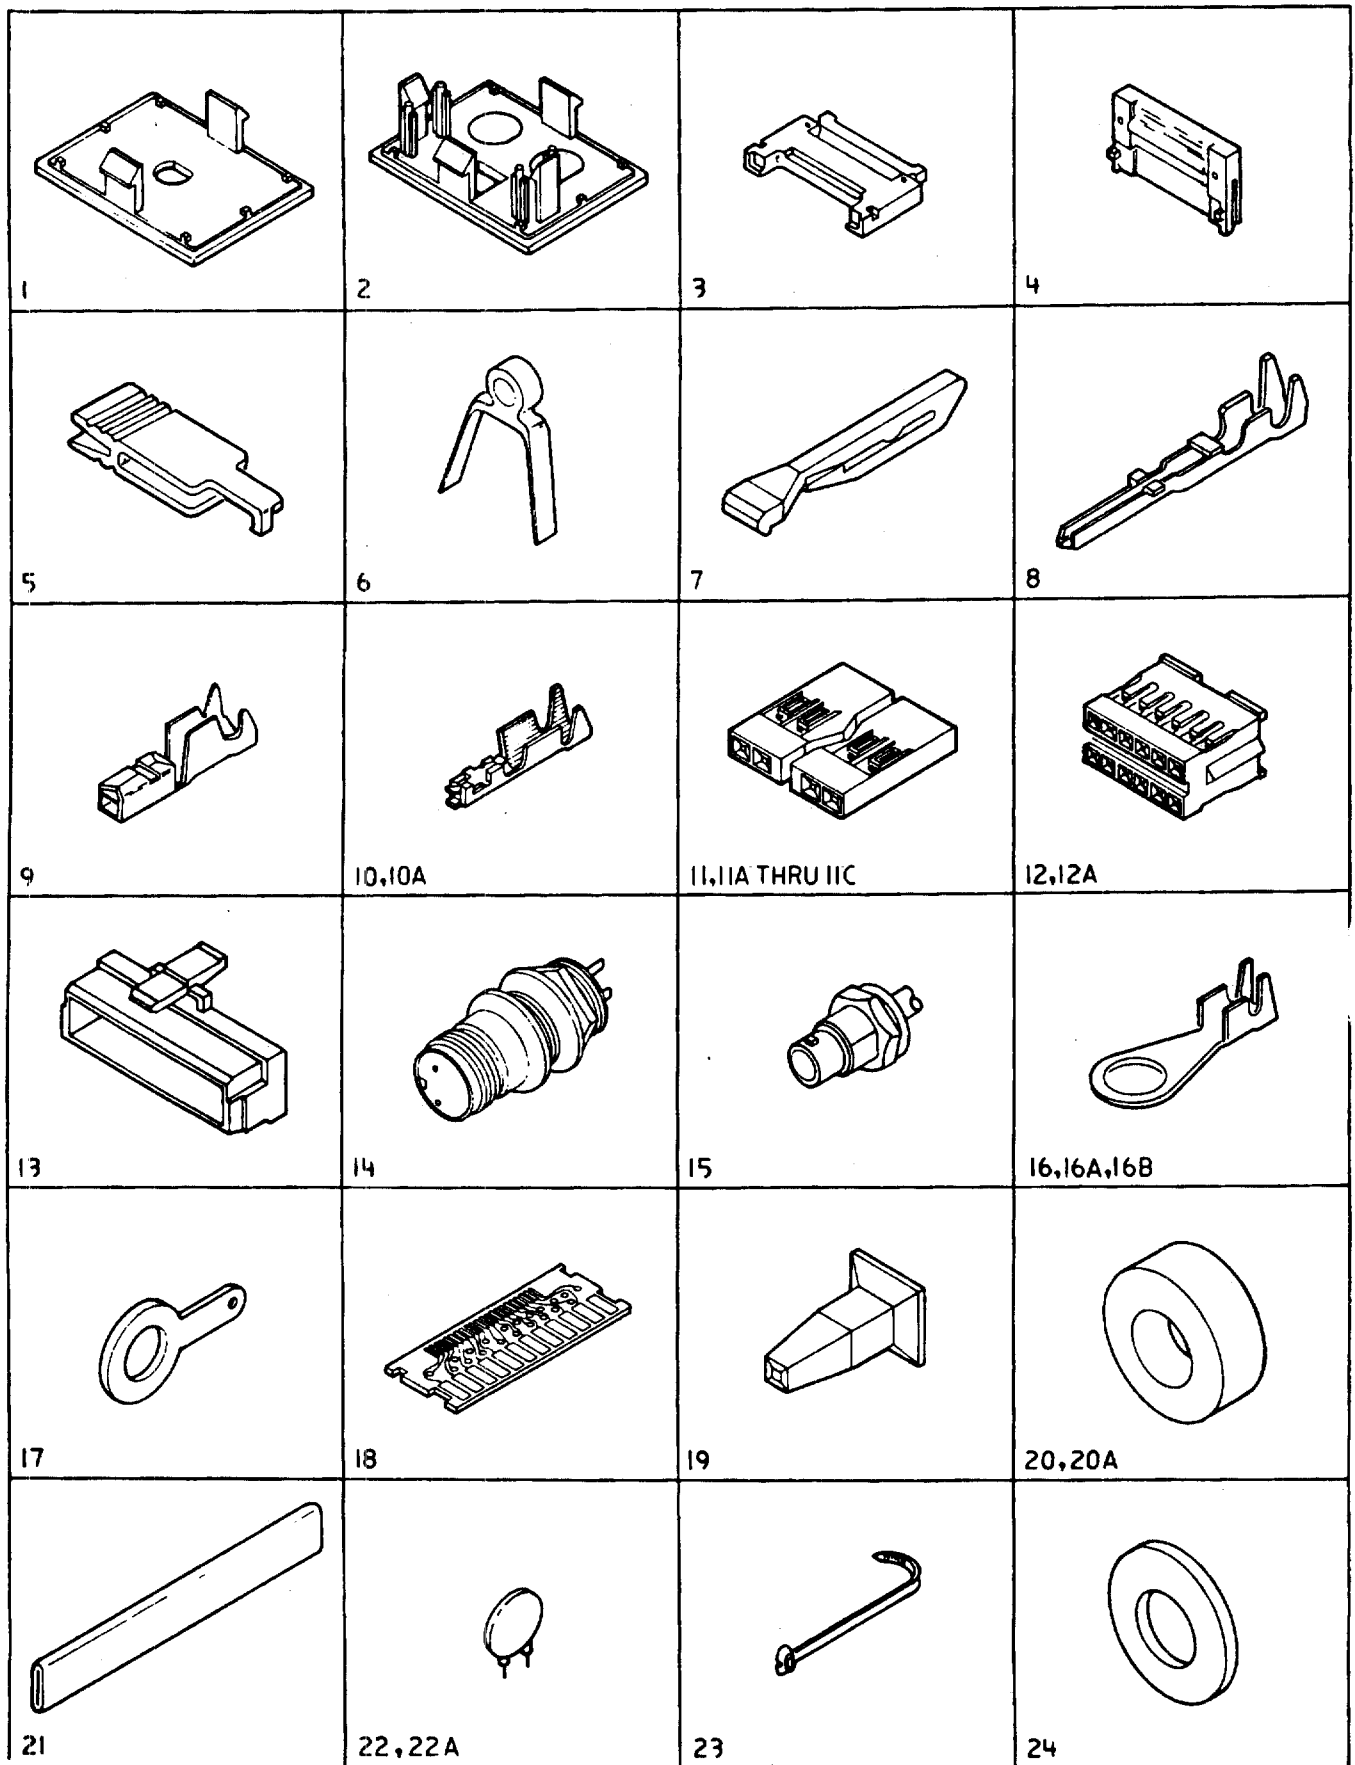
CABLE ASSEMBLIES AND COMPONENT PARTS (2 of 3)
